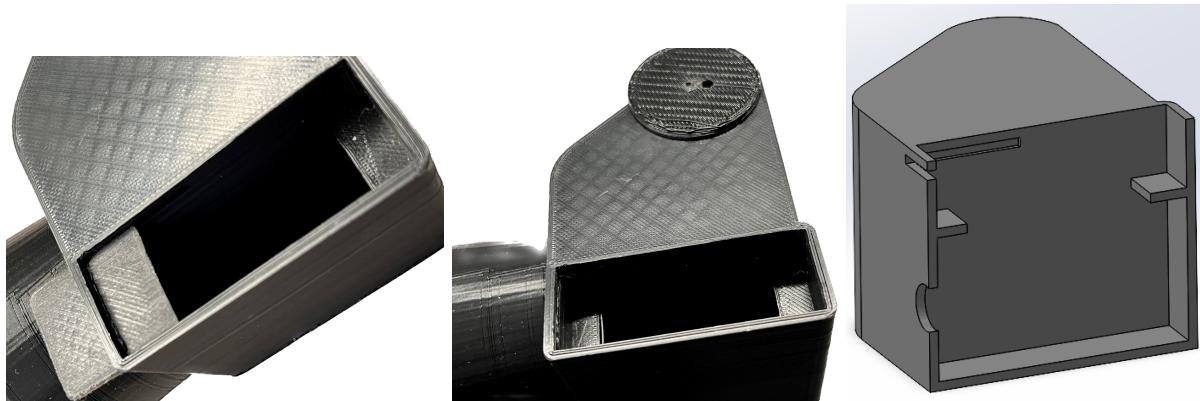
Wrist-Palm part with a motor housing and a slide-in lid (Left). Shelves in the motor housing (Middle). Section view (Right)
